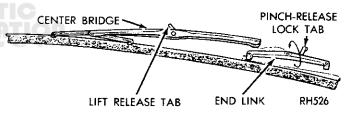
Removing Wiping Element From Blade Assembly Type "B"
